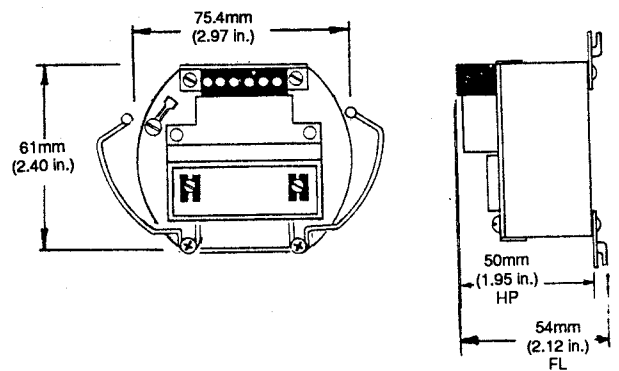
Dimensions for the EP-FDX Transmitter Unit with HP Housing.
